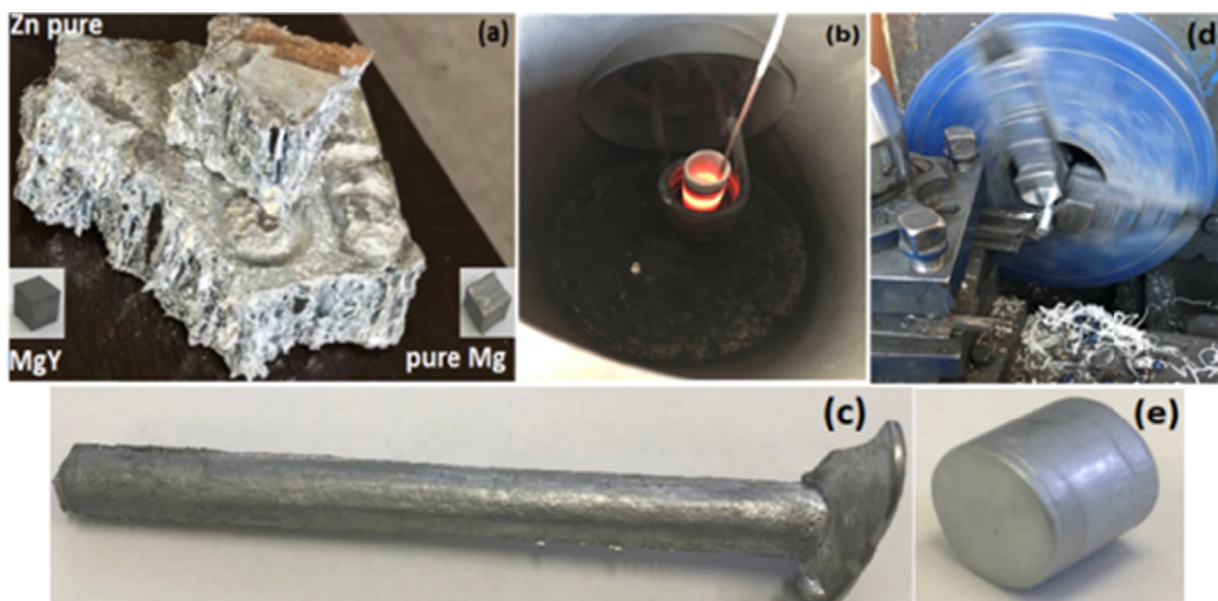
Manufacturing process: (a) materials used, (b) induction furnace, (c) ingot, (d) lathe machine, (e) final product
